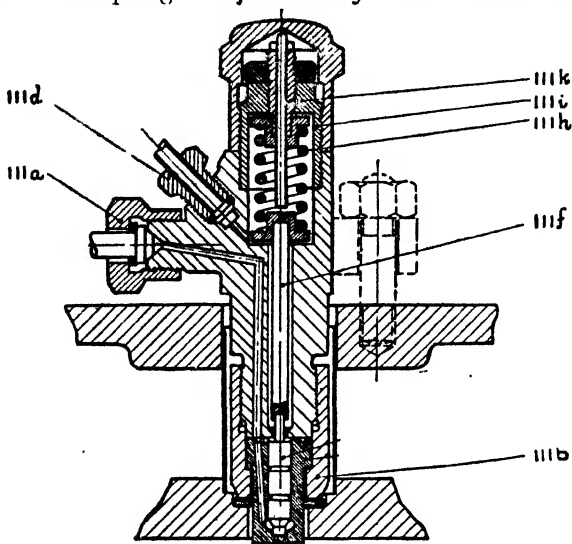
The C.A.V.-Bosch Nozzle Holder, Type BKB-S24, showing Packing Washer.
